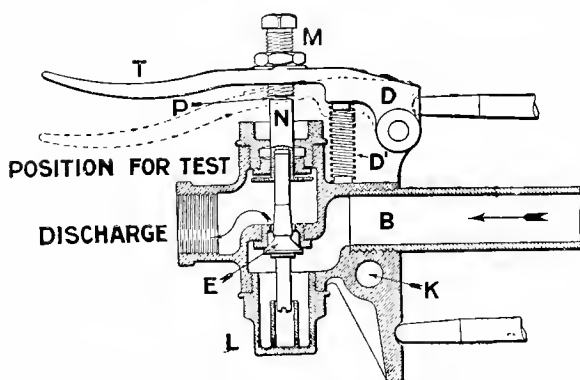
SECTION OF EXPANSION STEAM TRAP.
